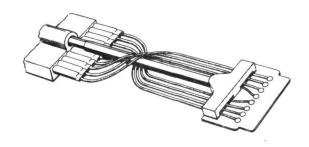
List of Recommended Special Tools (Sheet 3)
